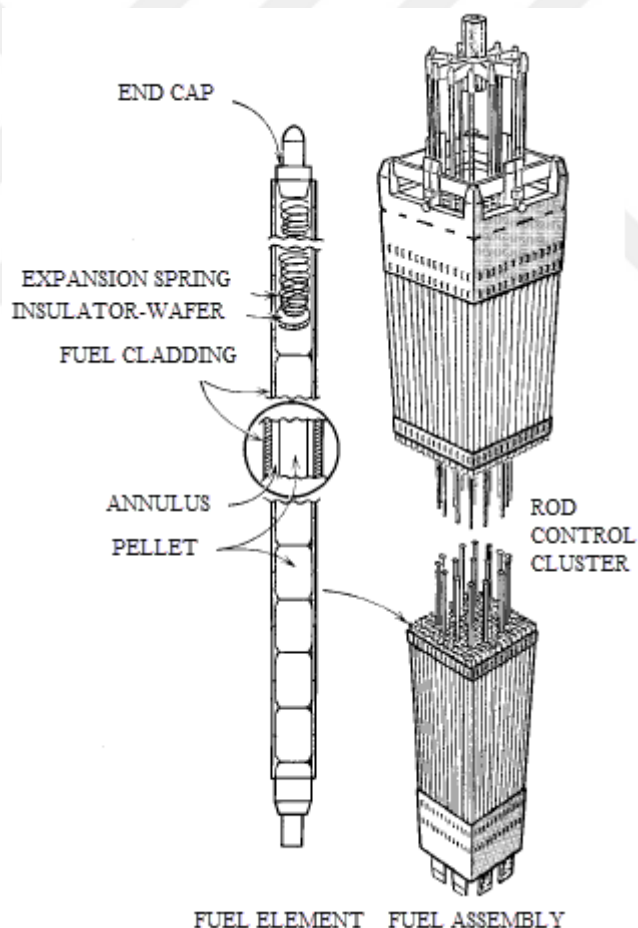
Fuel element and fuel assembly for BWRs [10].
